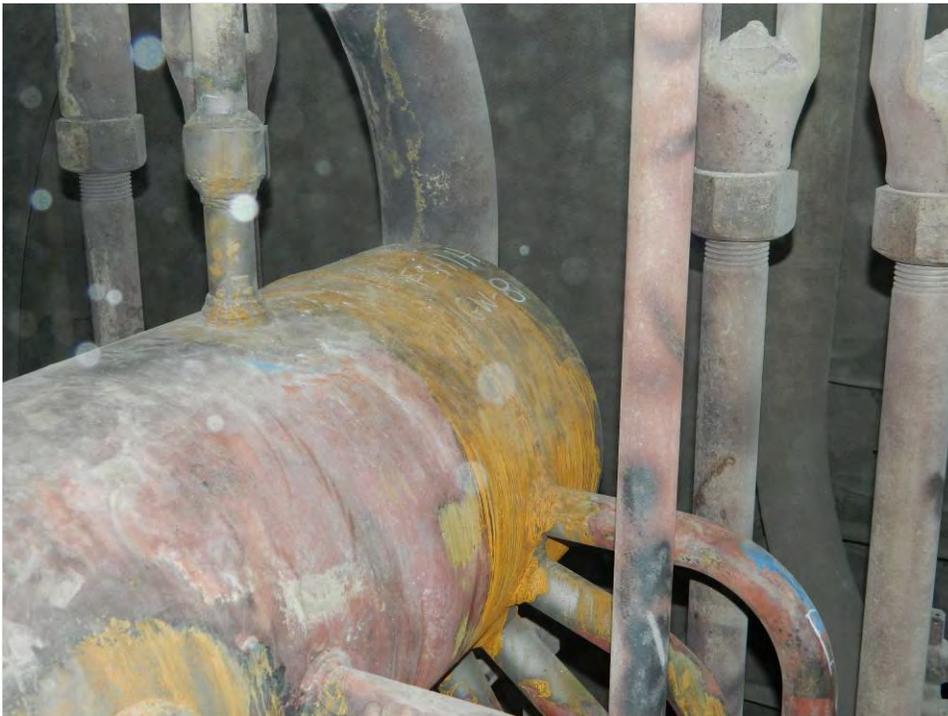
Photographs of girth weld Nos. GW-7 and GW-8 on the Finishing Superheater Inlet header.
